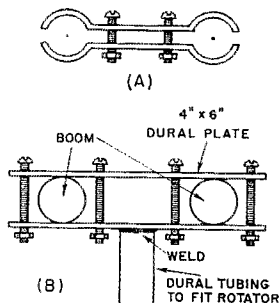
Sketches showing a boom-spacing clamp (A) and arrangement for mounting the boom on the rotator (B).
